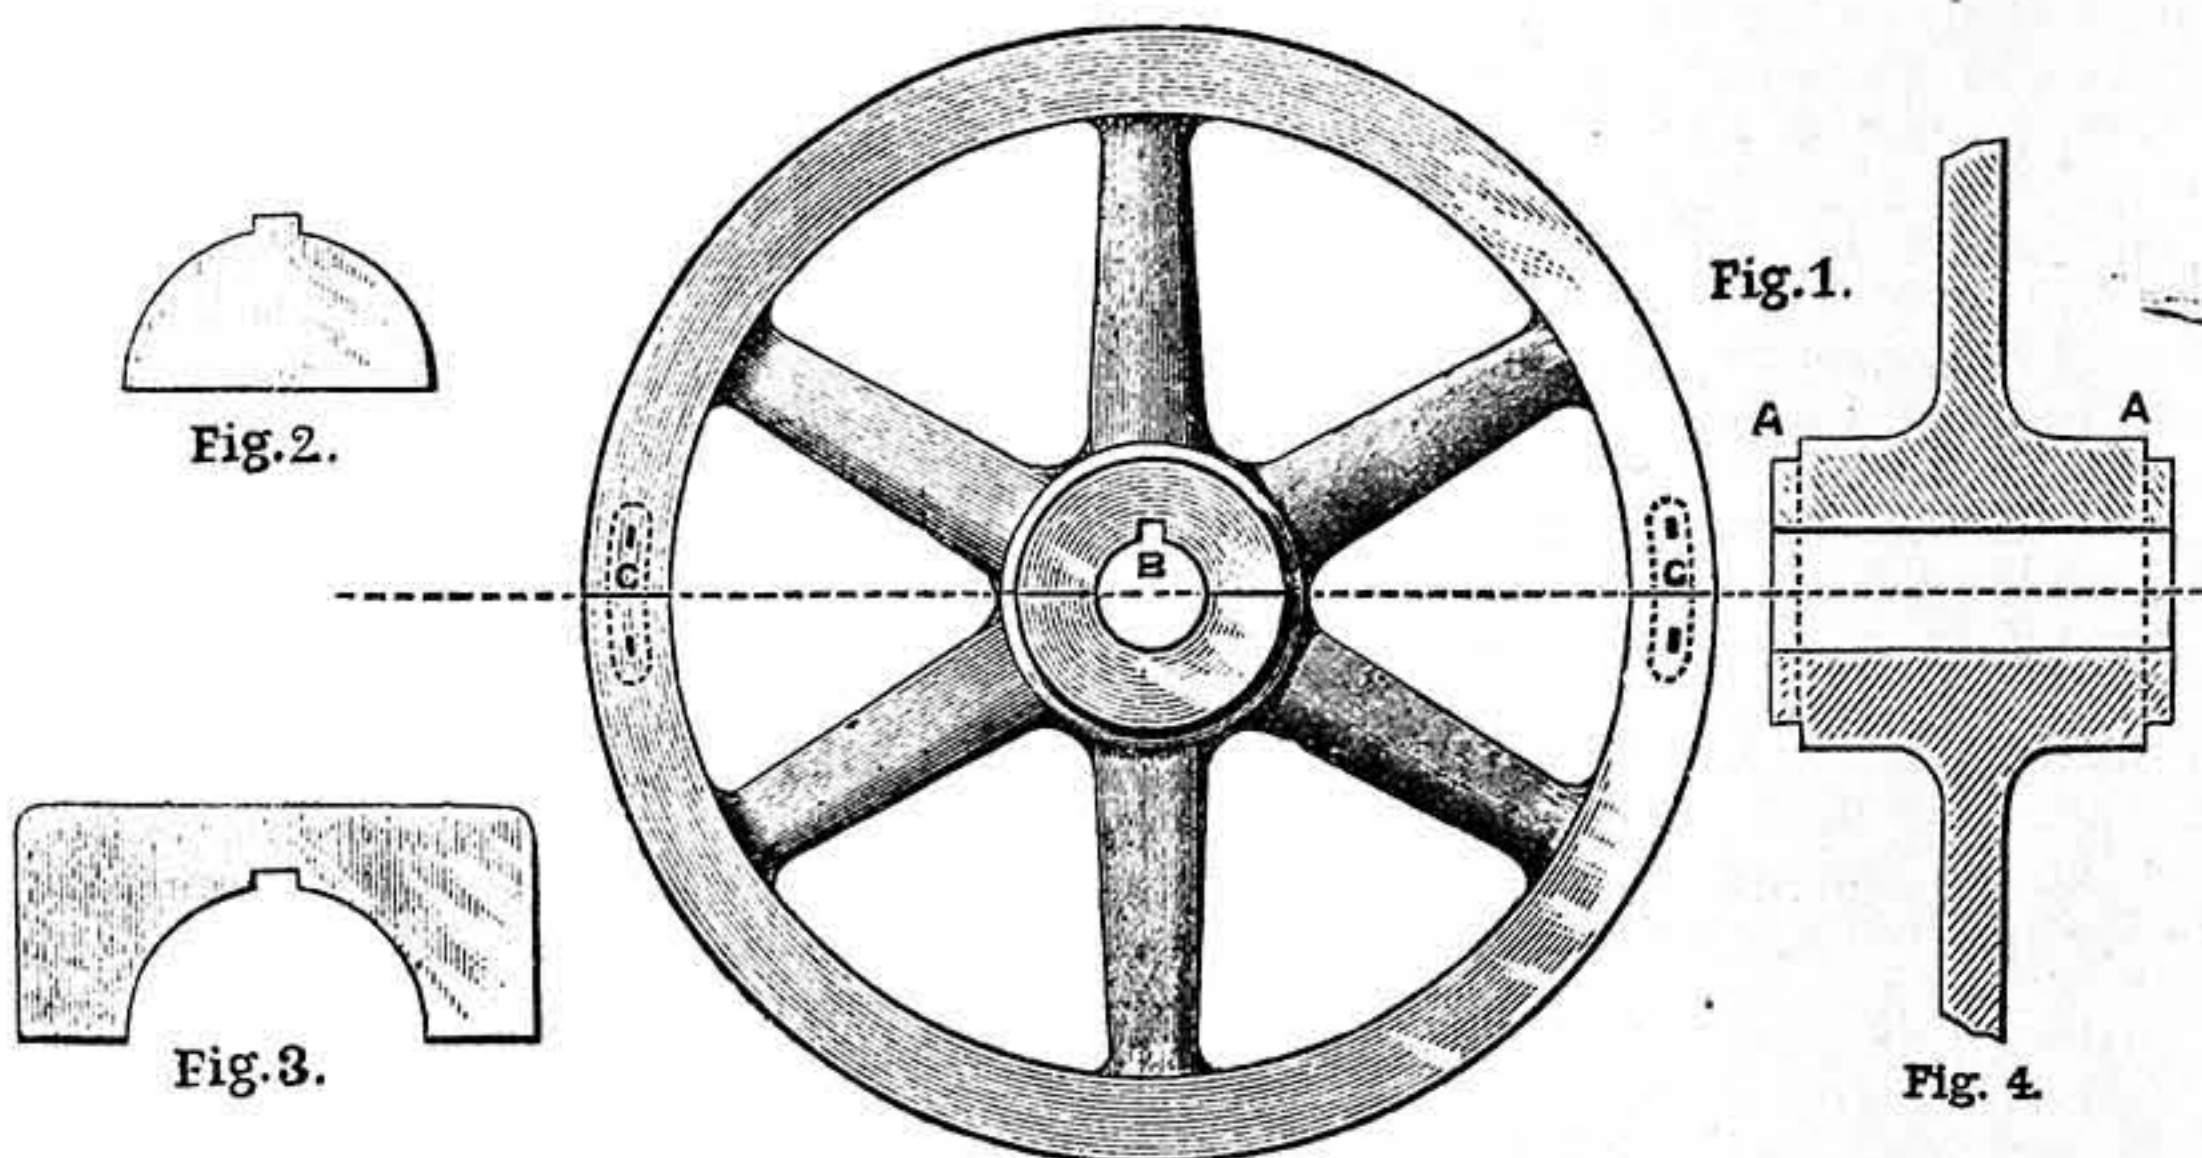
View of Wheel showing Keyway at B, and Dowels and Tapered Keys at C, C. Fig. 2.—Gauge to be fitted to Wheel. Fig. 3.—Gauge by which Key is to be fitted. Fig. 4.—Section of Boss, showing Recesses for Hoops at A, A.
